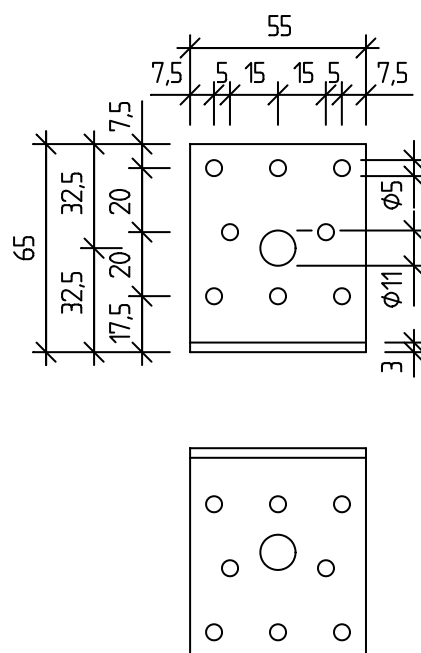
Dimensions of Angle Bracket type 7/65x65x3,0x55
